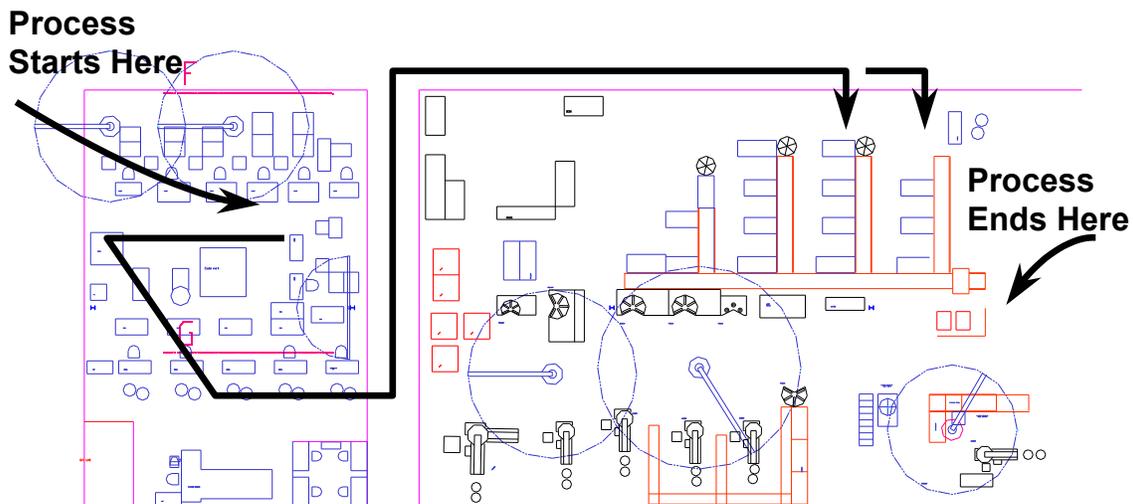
Transformer Winding and Assembly Layout Before kaizen Improvement
